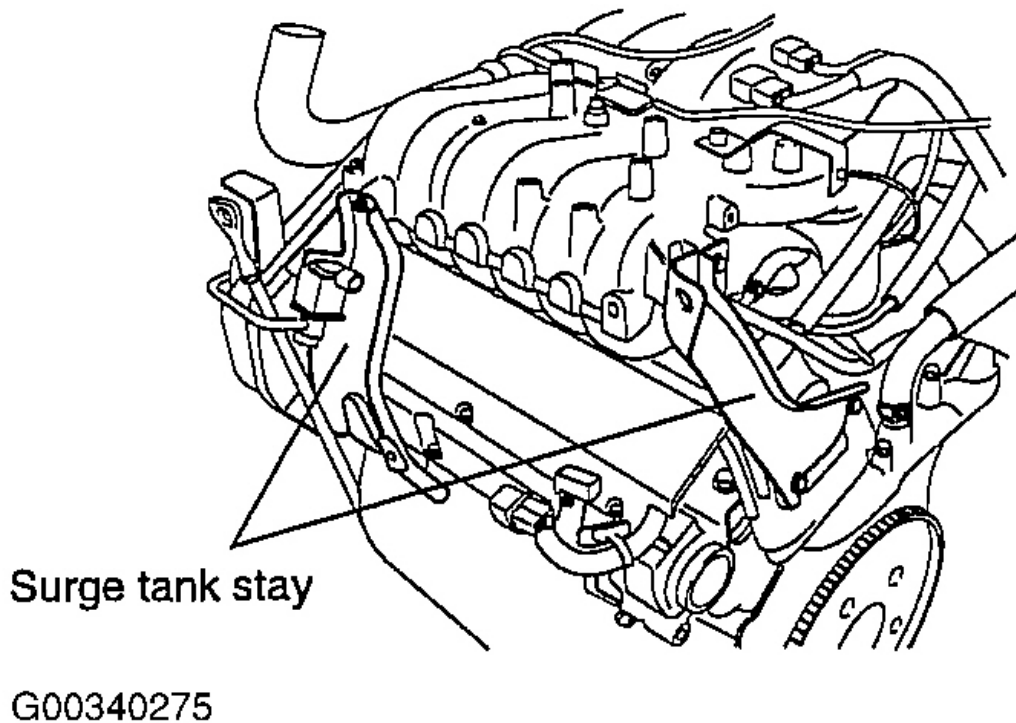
Identifying Surge Tank Stays (Engine Left Rear View)
